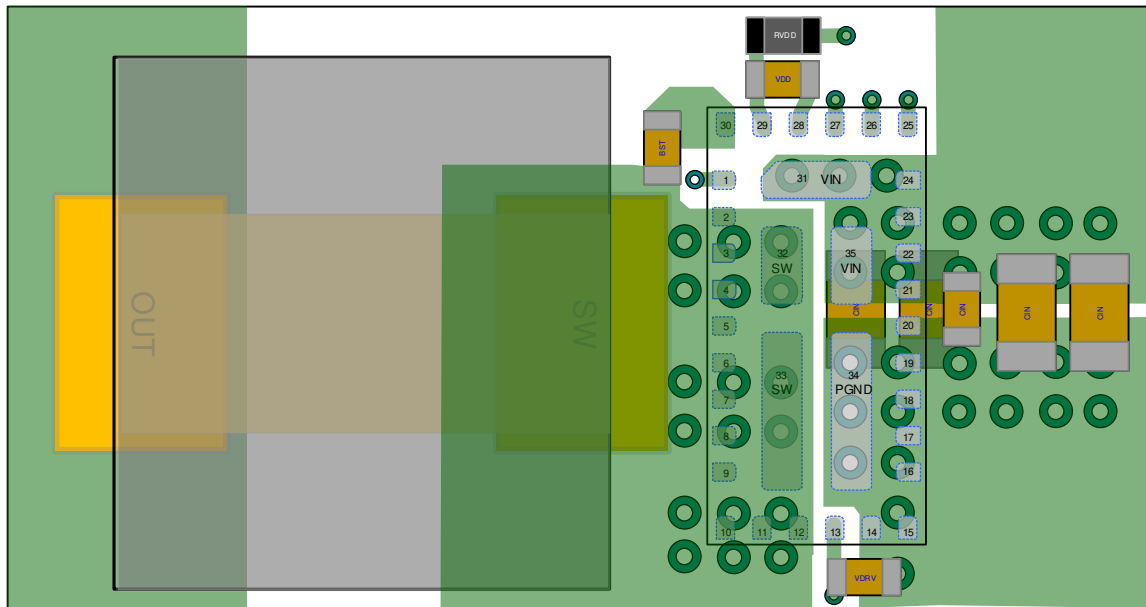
Recommended PCB Layout (Placement and Top Layer)
